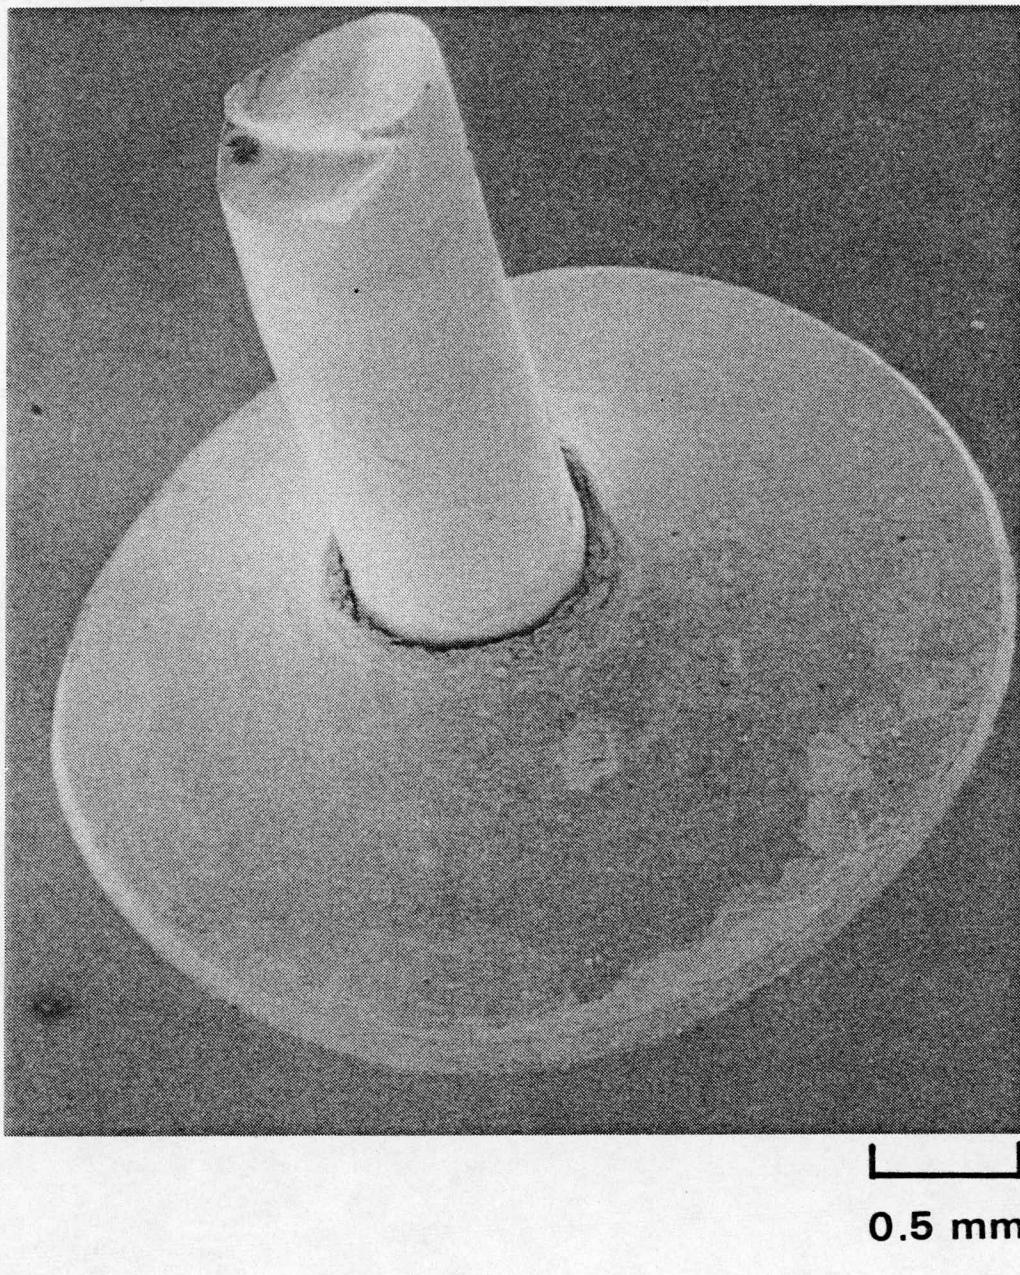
Scanning Electron Macrograph Showing a Solder Joint With a 360° Crack After Thermal Cycling
